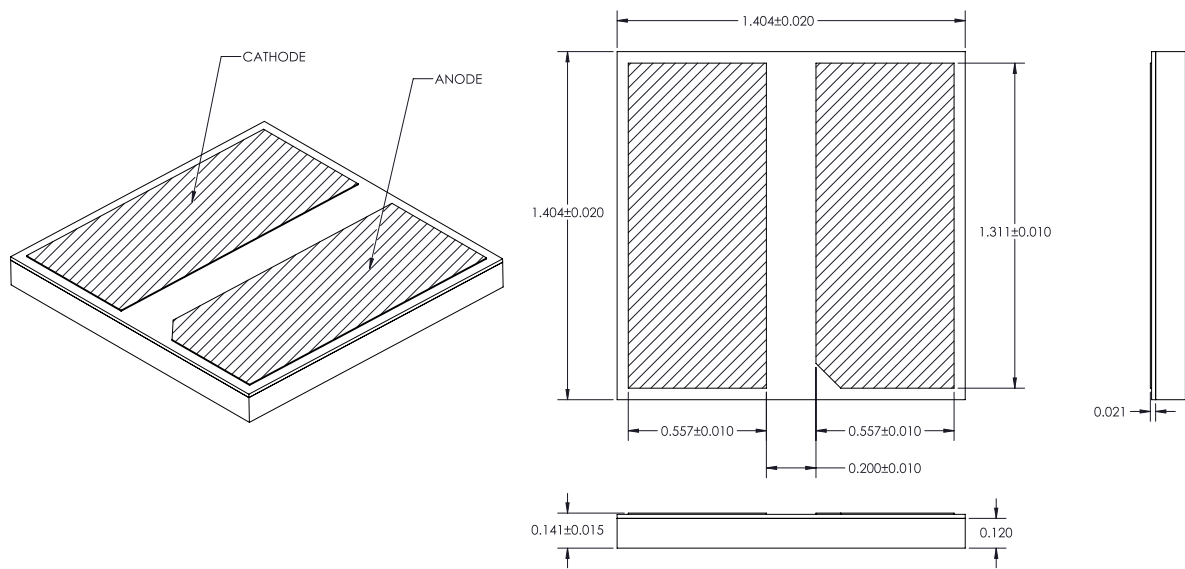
Mechanical dimensions for LUXEON UV FC2.
